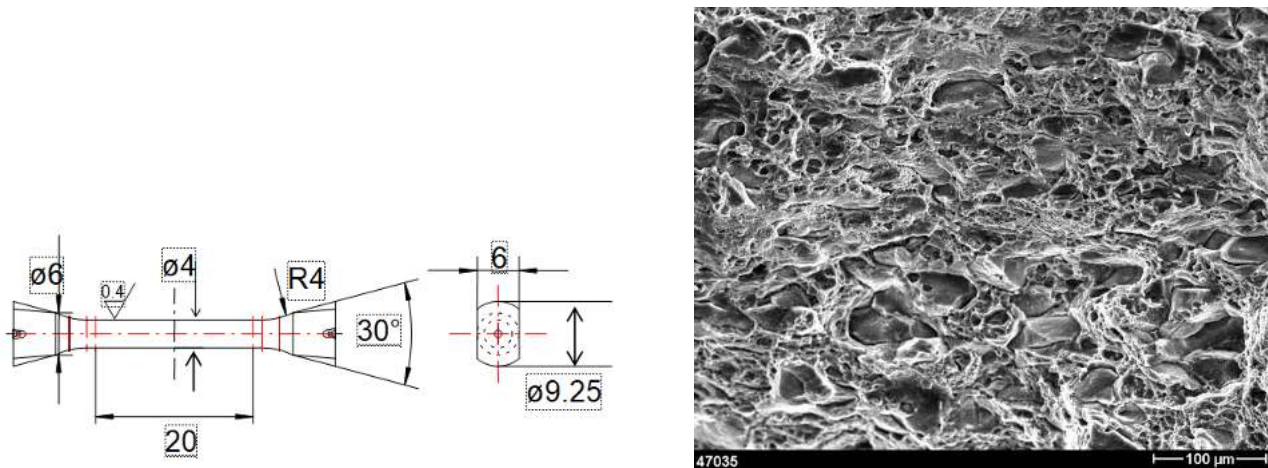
(left) Geometry of the tensile rod; (right) Voids, seen on the fracture surface [IWM Freiburg],
